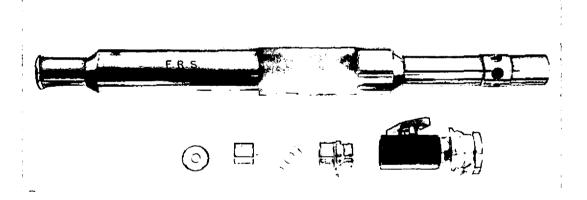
THE FINAL DESIGN OF BRANCHPIPE ASSEMBLED, AND DISMANTLED TO SHOW ITS COMPONENT PARTS
